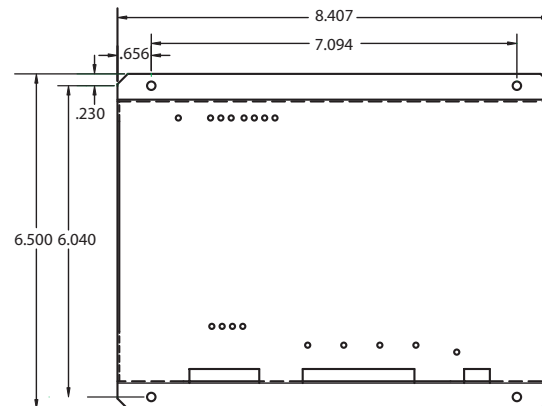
Mounting Dimensions for the NB-GPC3 (all dimensions in inches)
